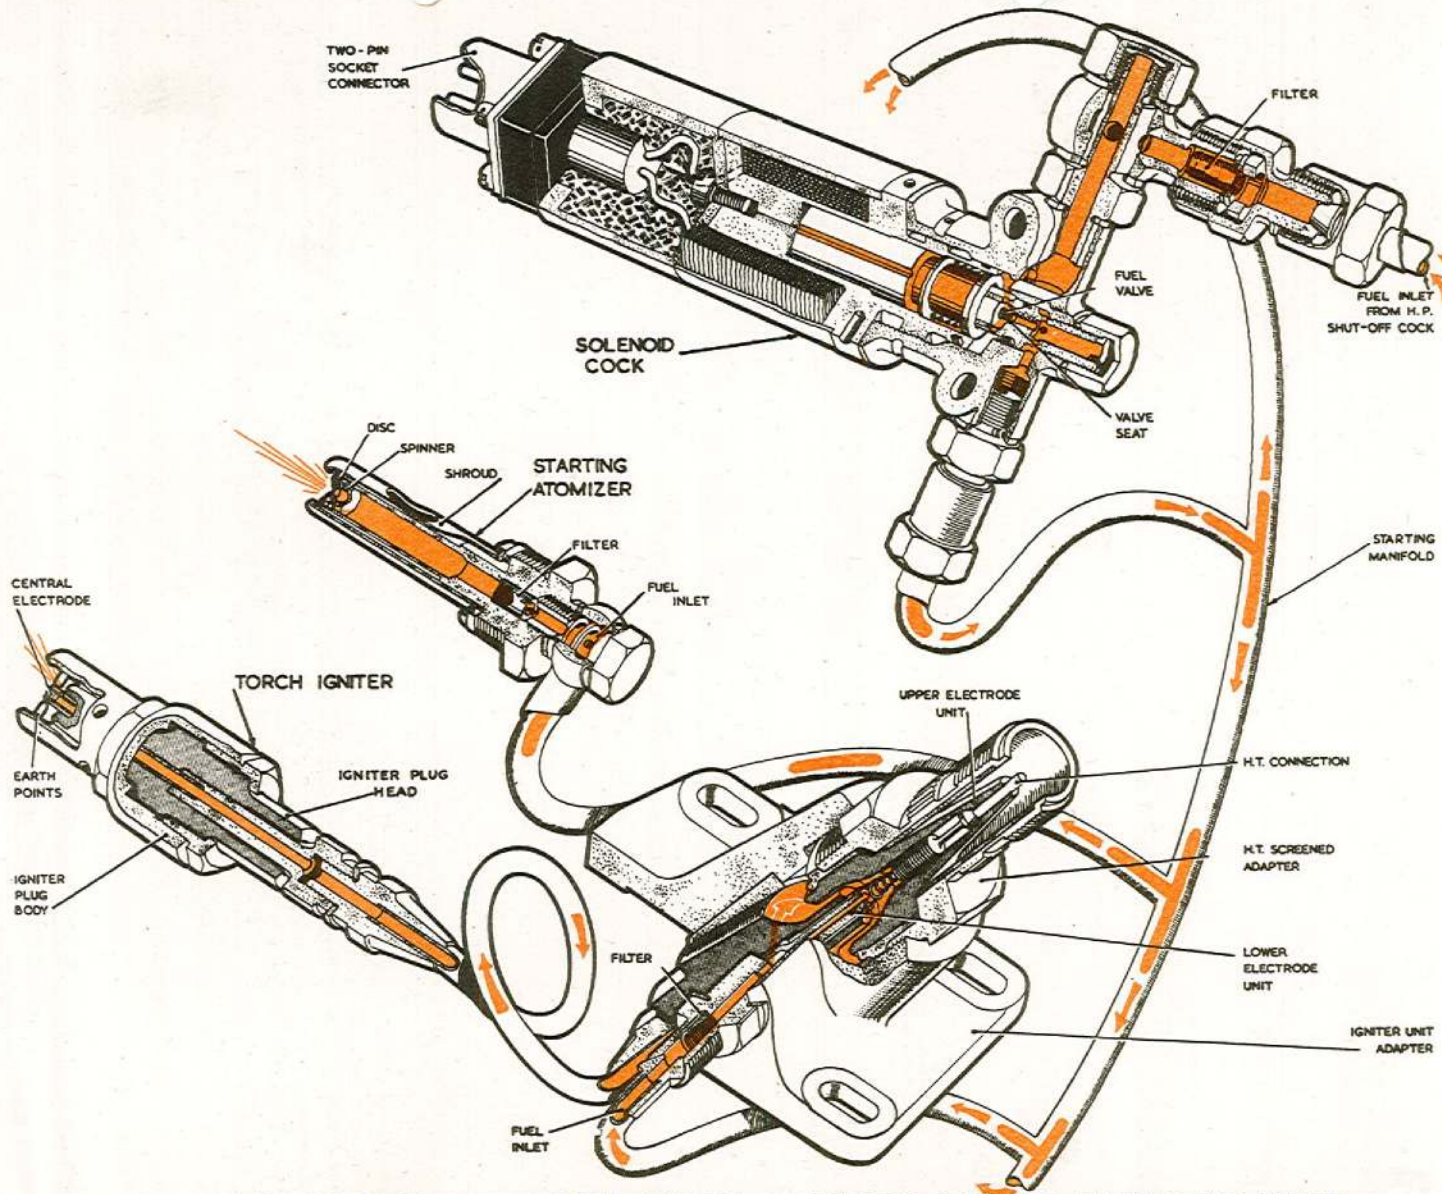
SOLENOID VALVE TORCH IGNITER & STARTING ATOMIZER SHOWING FUEL SUPPLY
